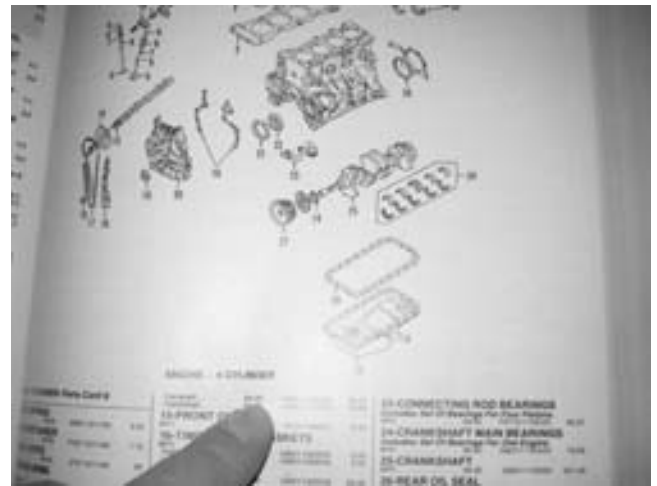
An exploded view of an engine as shown in a time and parts guide.
